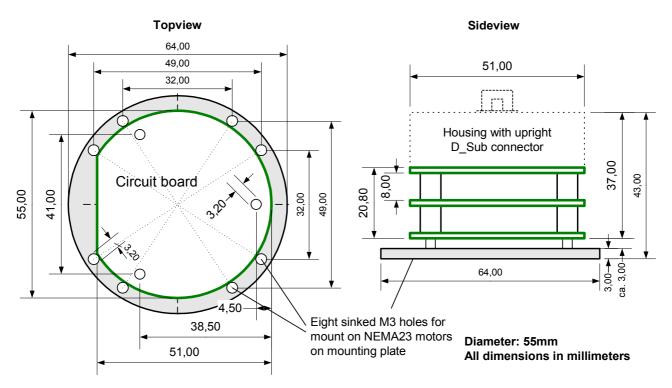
Mounting holes / dimensions of TMCM-111-56
